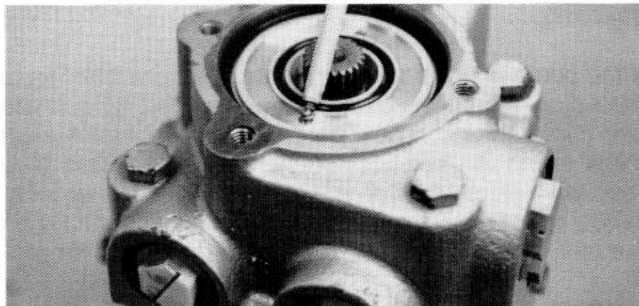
Remote Pressure Filtration Pipe Plug
